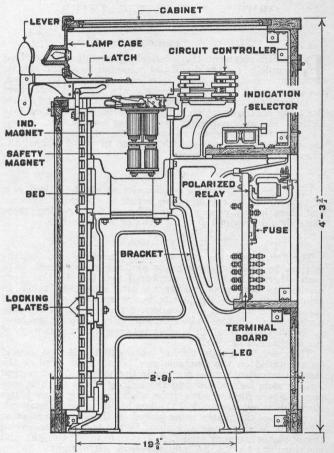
Model 2 Unit Lever Type Interlocking Machine
